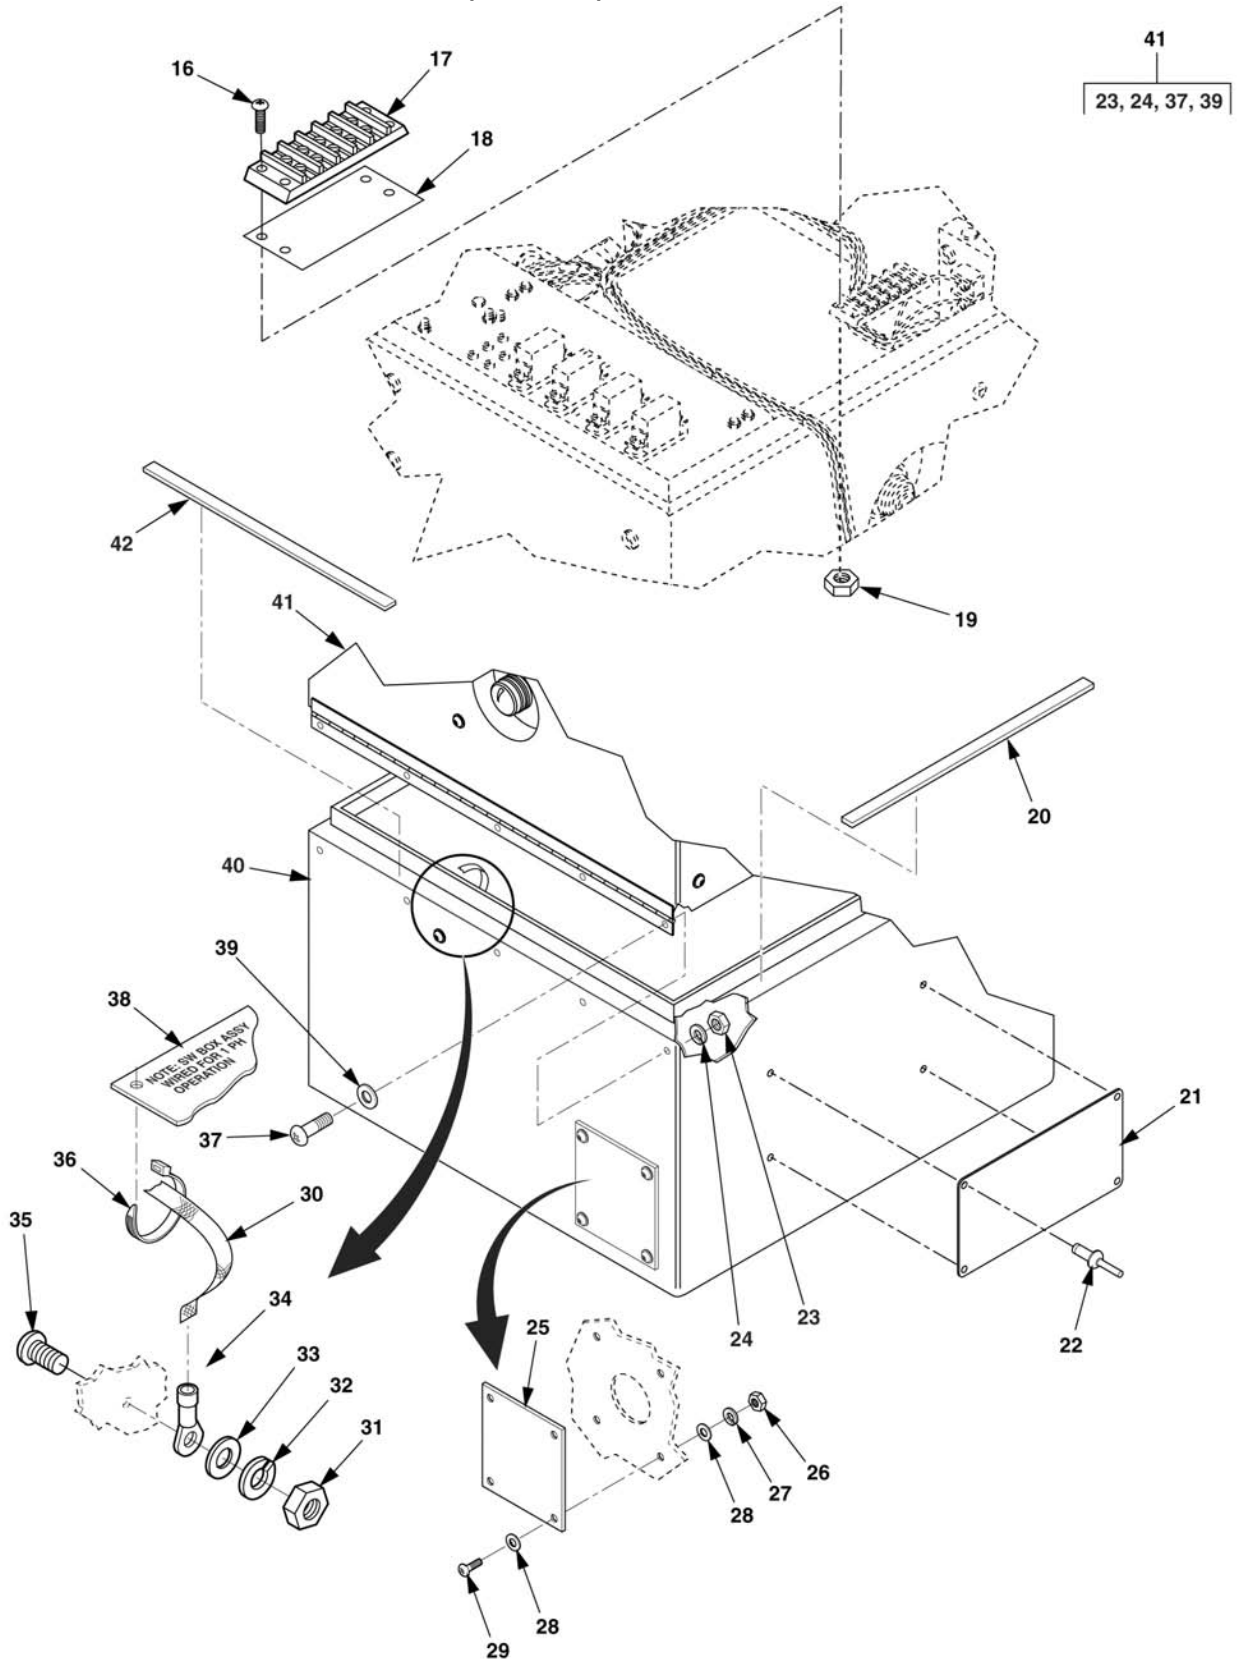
Switch/Box Assembly, 97403 13230E6950 (Sheet 2 of 3)
